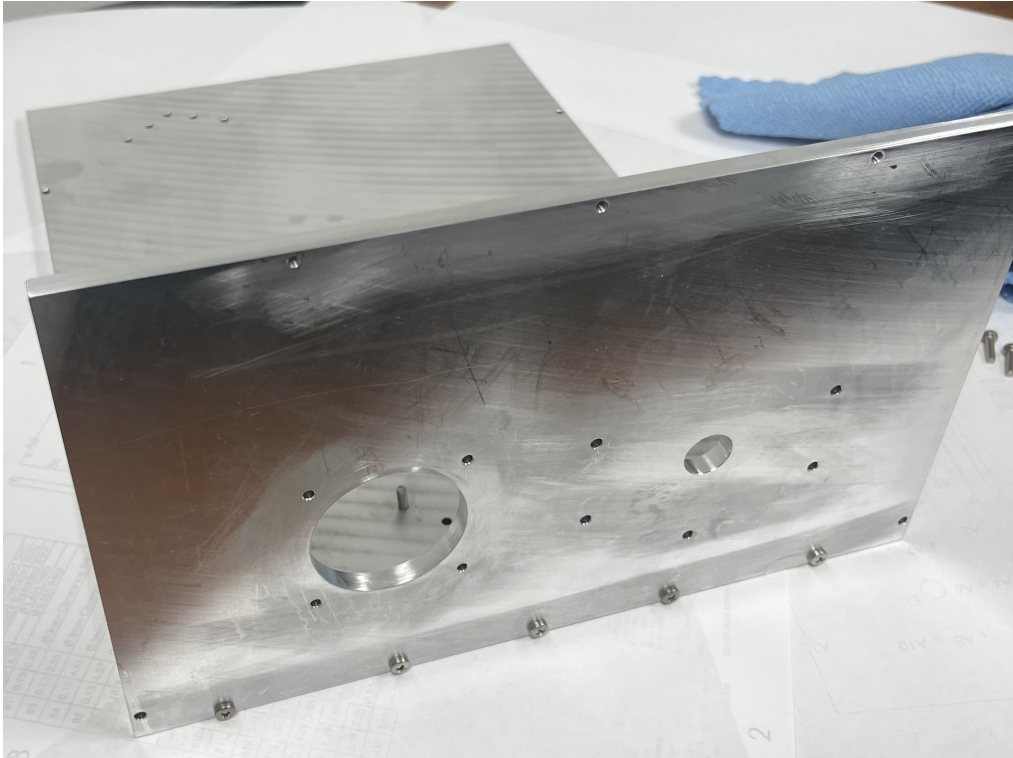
The machined front plate and mounting base plate after being connected with M3 screws.
